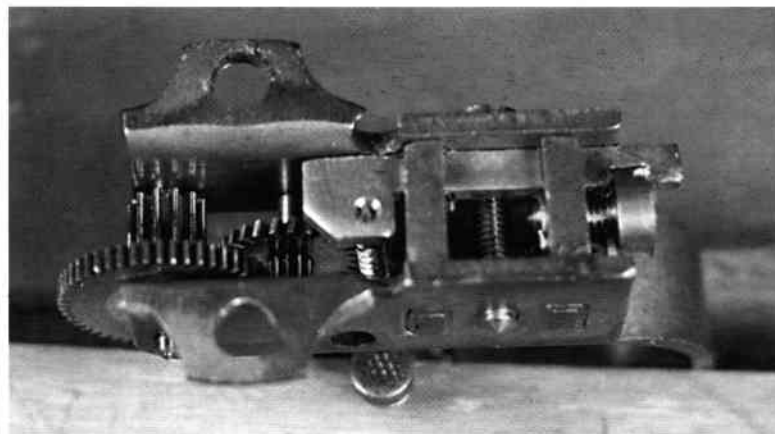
Underneath view of governor, showing the flanged side plates and the conventional adjusting screw for the lower bearing of the endless.
